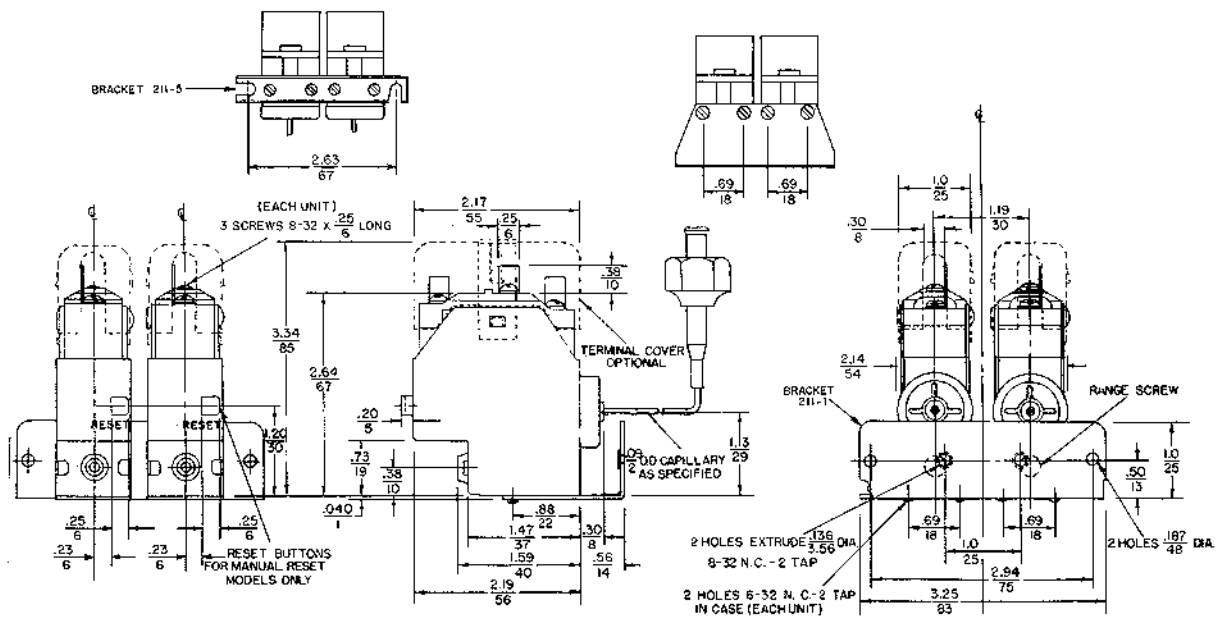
Dimension drawing of the Series P21 dual controls.
